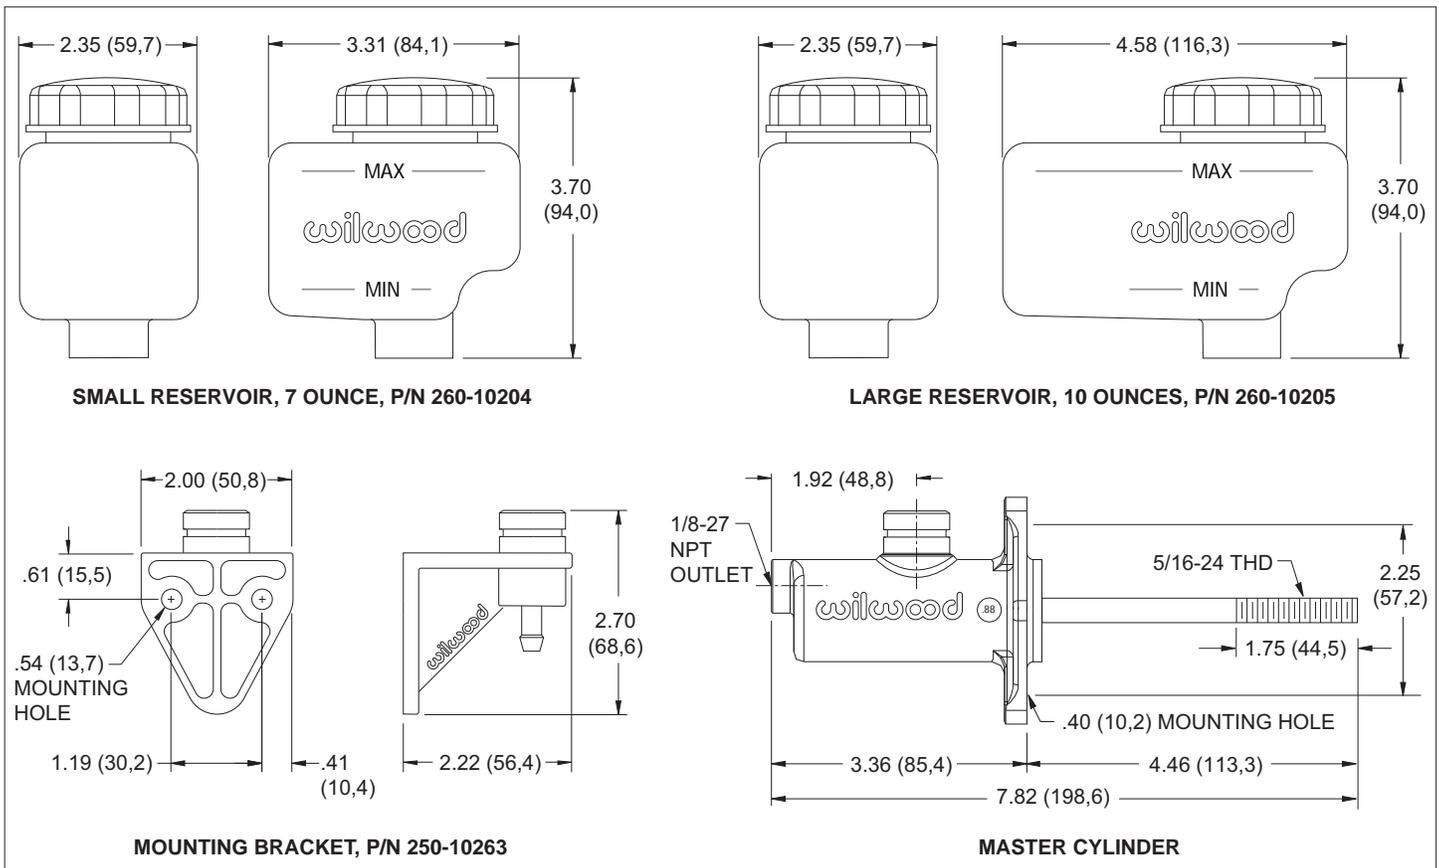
Minimum Mounting Requirements for Mounting Bracket, Master Cylinder and Reservoirs
